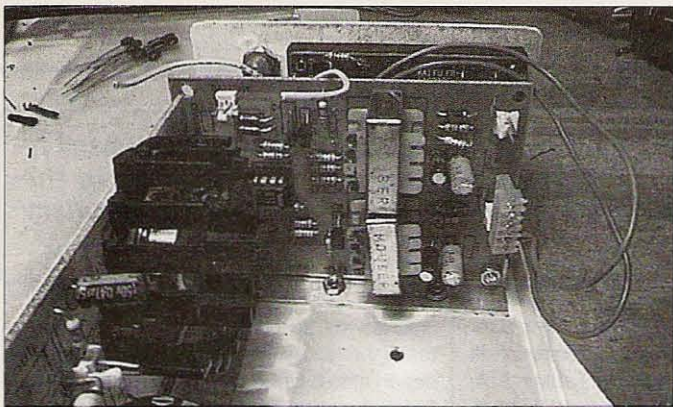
Photo C. Here is a view of the panel meter supply. The QRP bench PC board is mounted on edge.
